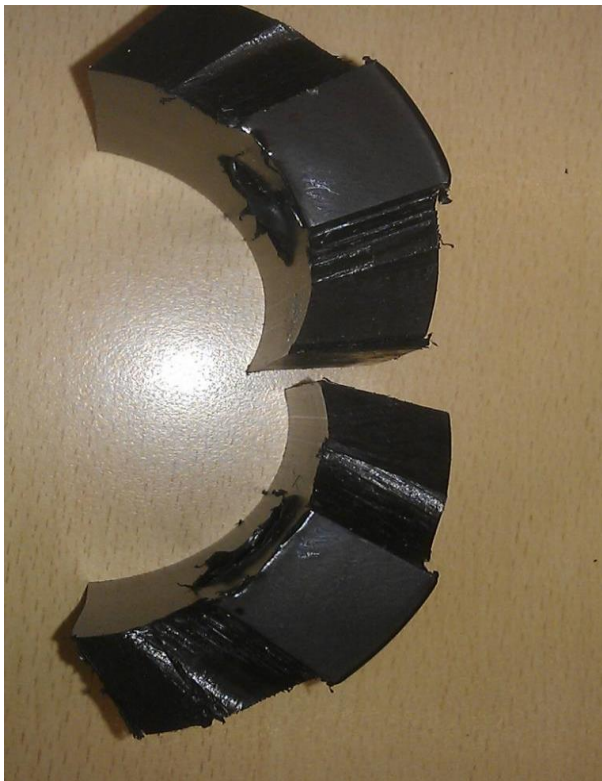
Brittle failure in a tensile test specimen due to a cold weld in a butt fusion joint.
